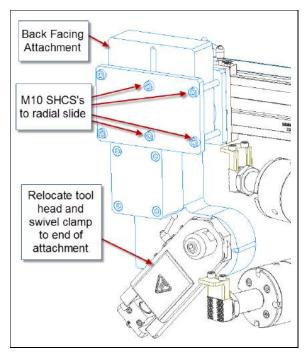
INSTALLING THE BACKFACING ATTACHMENT TO THE TURNING ARM
